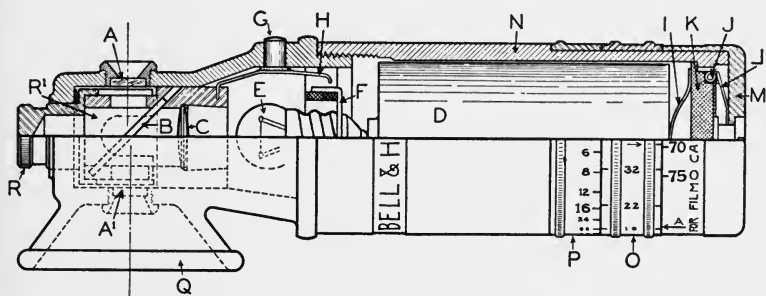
Sectional drawing of the Bell & Howell Photometer.
